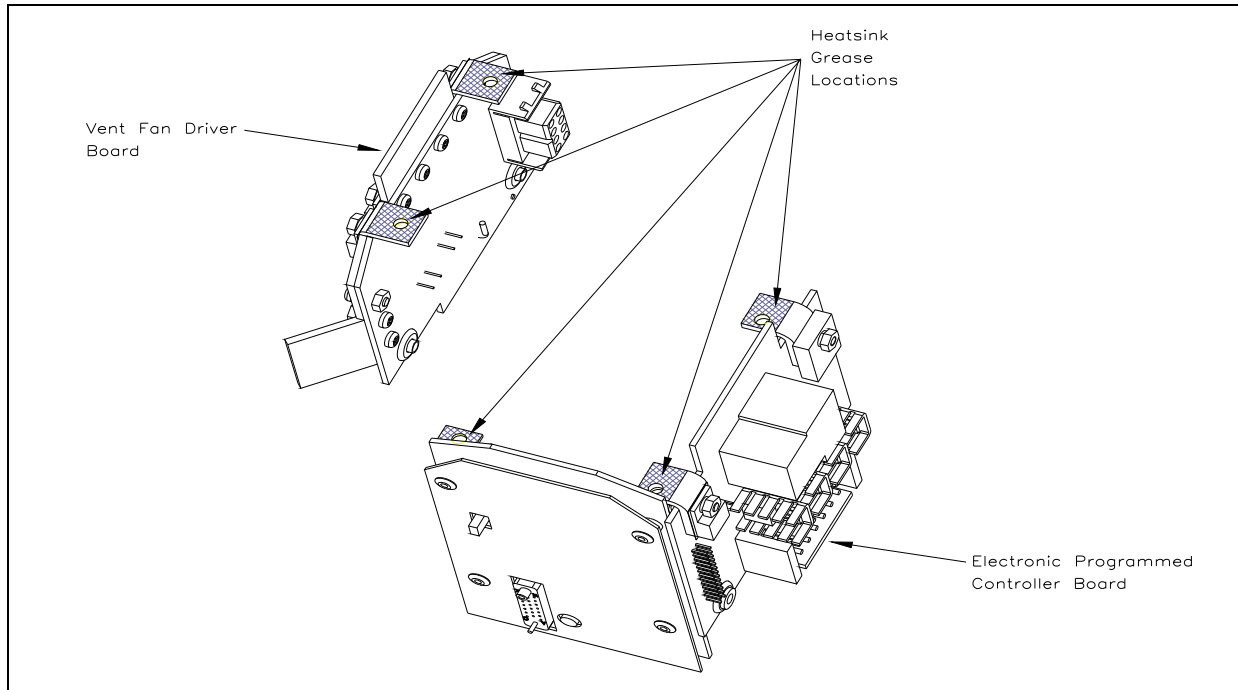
Detail, Circuit Board Brackets Requiring Heat-Sink Compound
